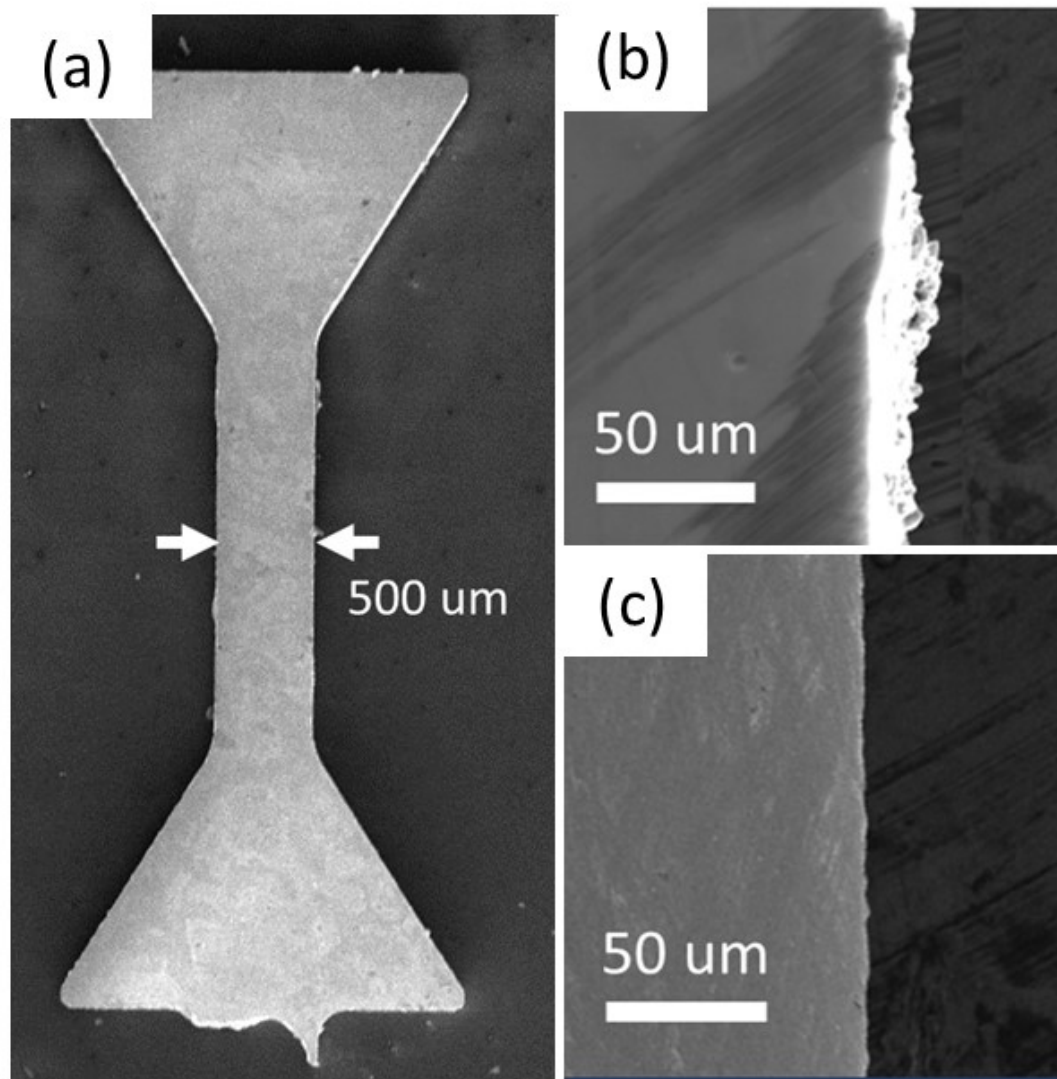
(a) Image of wire EDM machined René 88 microsample with gage dimensions of 500 μm x 500 μm . (b) shows the surface roughness of a sample cut using machine prescribed parameters and (c) shows the surface roughness using our optimized parameters
